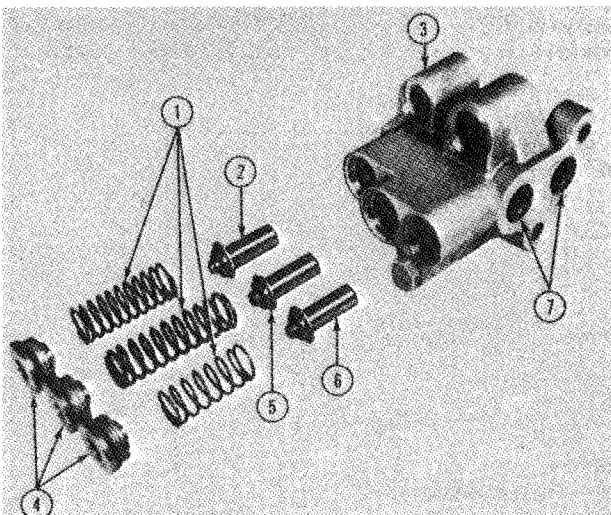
B—Exploded view of low pressure hydraulic system regulating valve used on TW-30 models.
